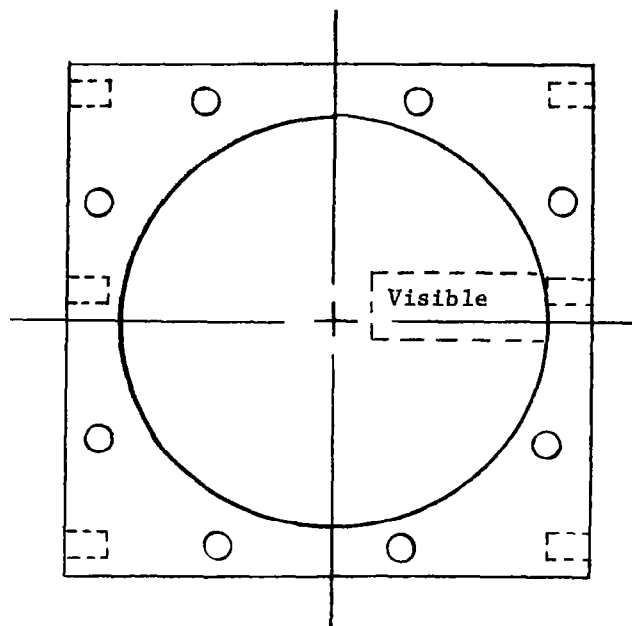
Dimensional Drawing of Beamsplitter Assembly No. 2 (KBr)
